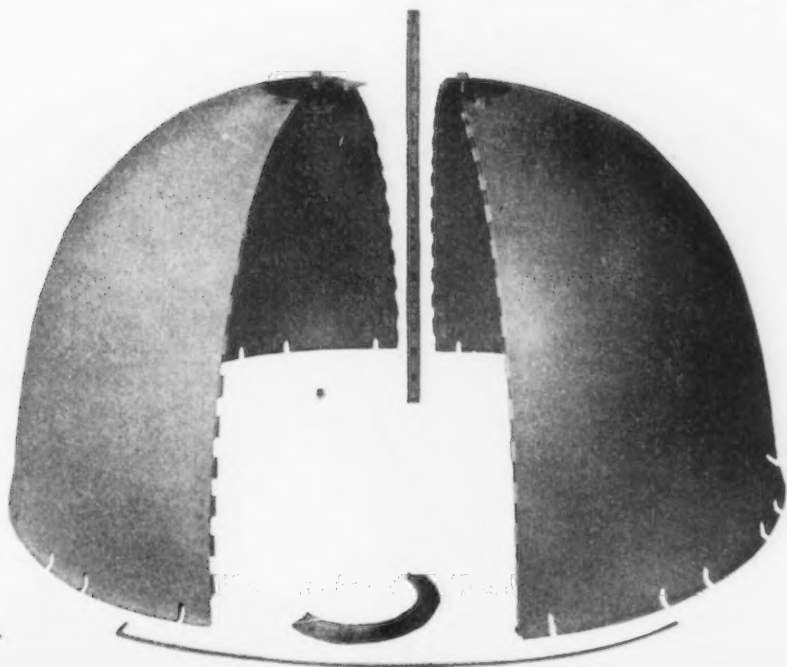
Helicopter shield assembly shown is a typical product of a combination of fabricating processes, being made by a succession of spinning, hand forming and riveting operations.
